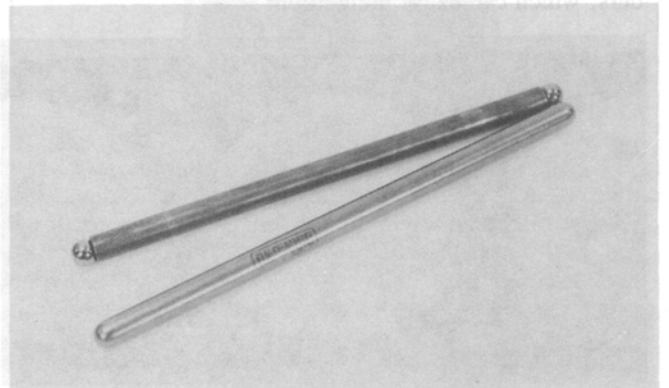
Production V6/60 pushrod has welded ball ends; extra-long aftermarket pushrod should be used with small base circle racing cams.
